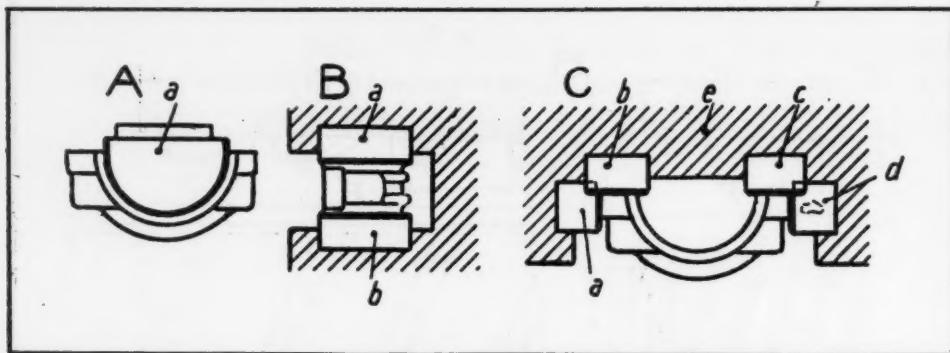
The disposition of cutting inserts depends on location of surfaces to be broached. The inner surfaces of a half-round connecting-rod are being broached at "A," the end faces at "B," and the joint faces and sides at "C." Cutting inserts are shown at "a," "b," "c," and "d," and broach-holder at "e"
